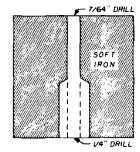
Simple jig for drilling hole in the center of a 1/4" shaft.
